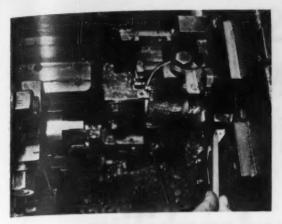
Setup in open die header. Pencil points to dies which are open to permit stock feeding. Shearing and two heading blows are operations in this machine.
